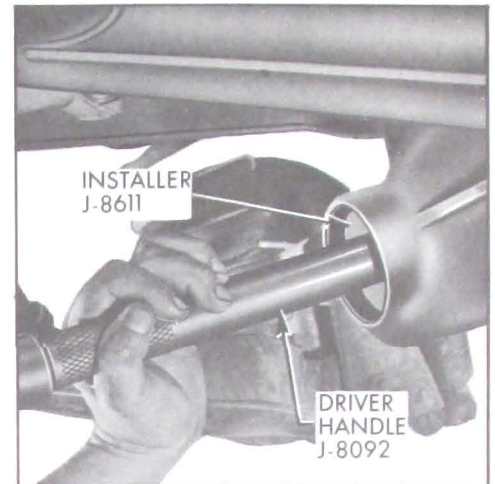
Installing Rear Pinion Bearing Outer Race
